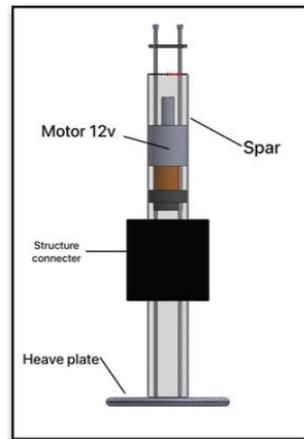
The CAD drawing of Point Absorber Wave Mechanism.
